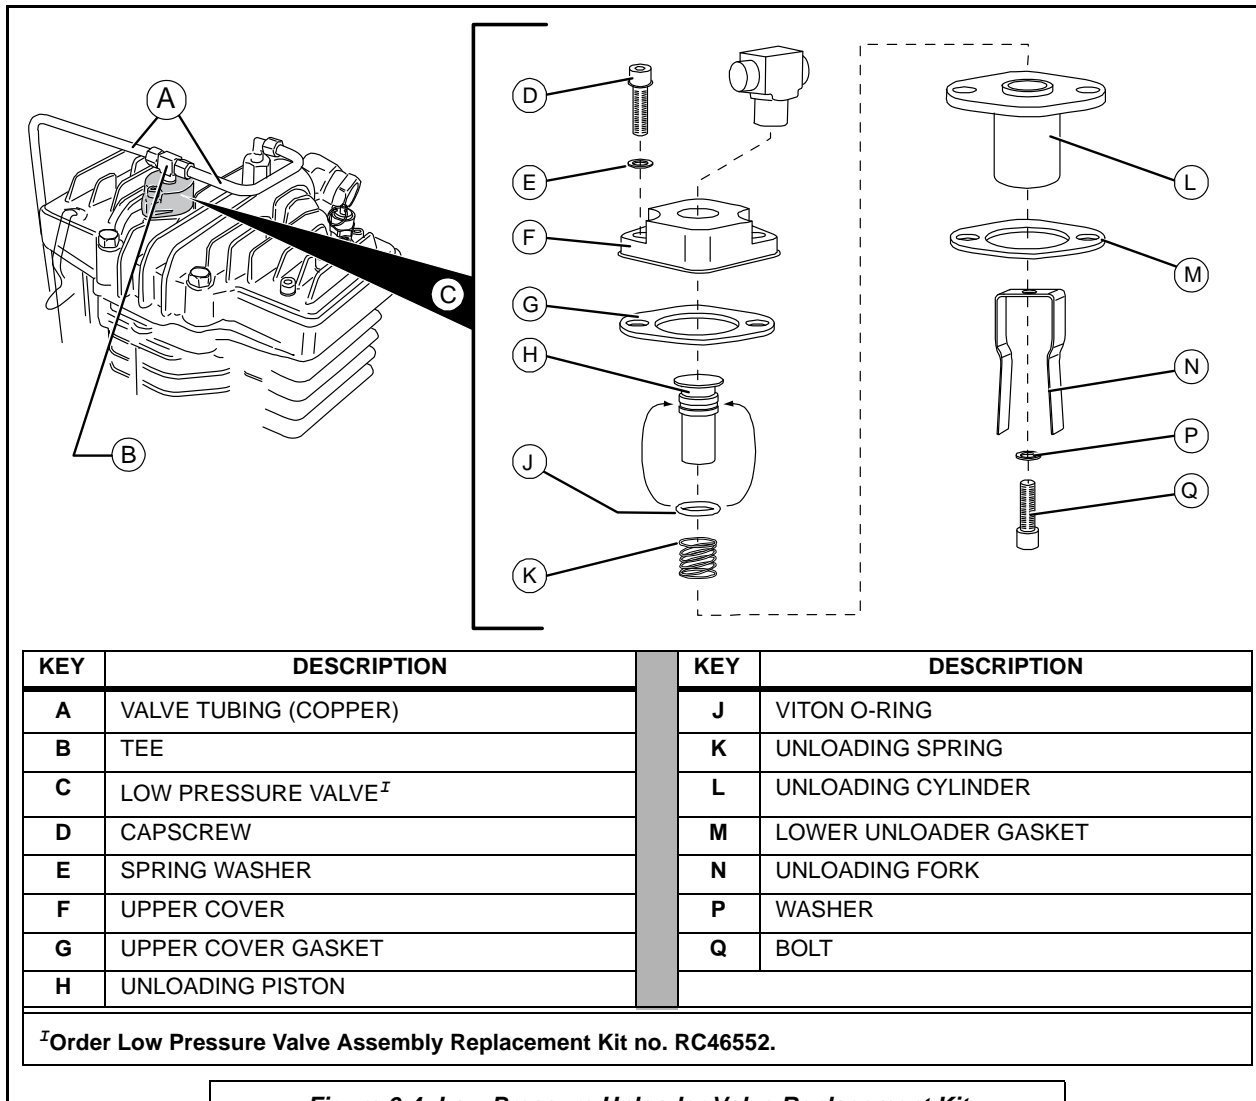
Low Pressure Unloader Valve Replacement Kit
